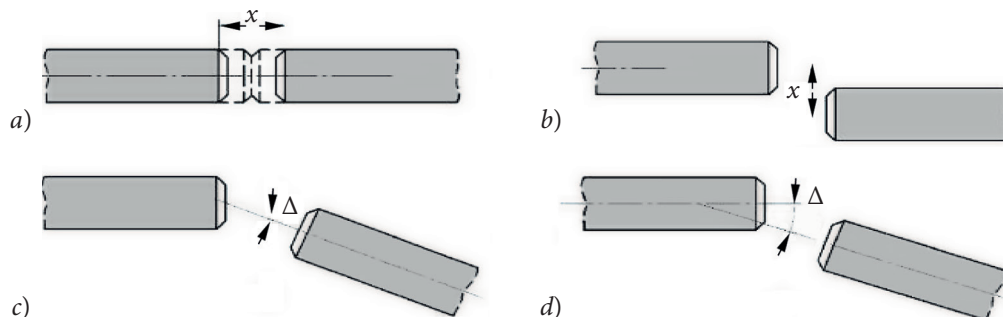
Displacement of the axes of the connected shafts of machine units: longitudinal (a), radial (b), angular (break) (c), combined (d)
